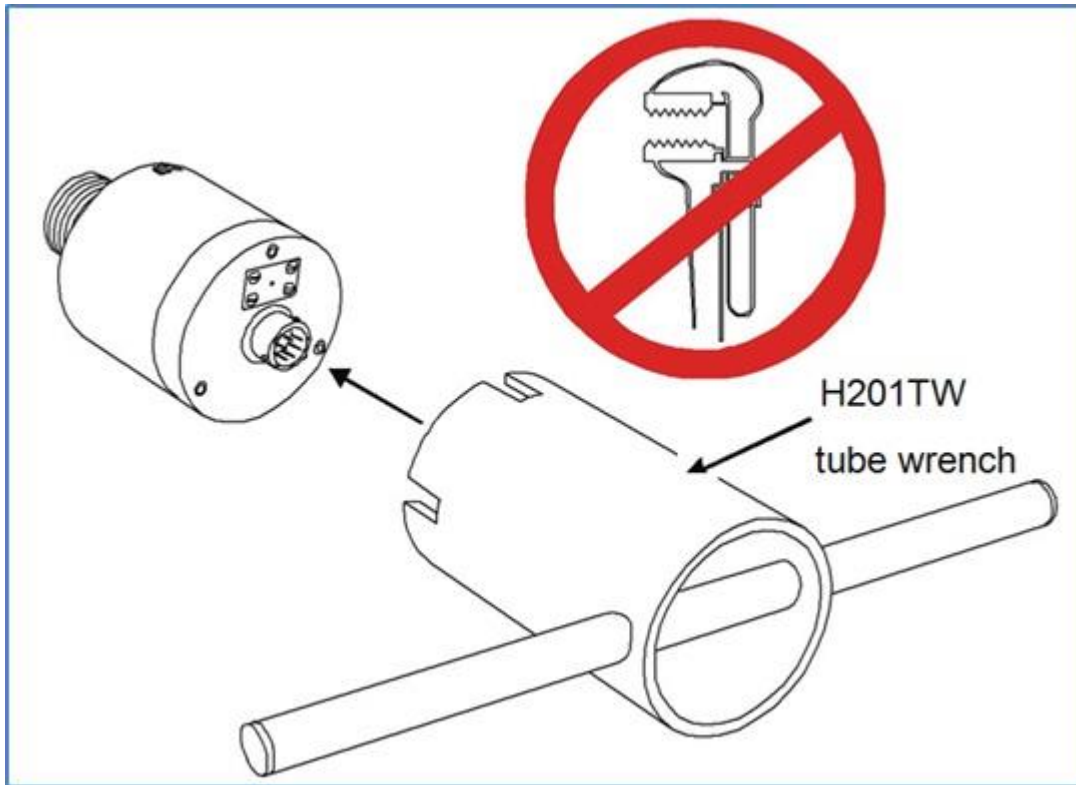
Use the Hydran 201TW instead of a Pipe Wrench
